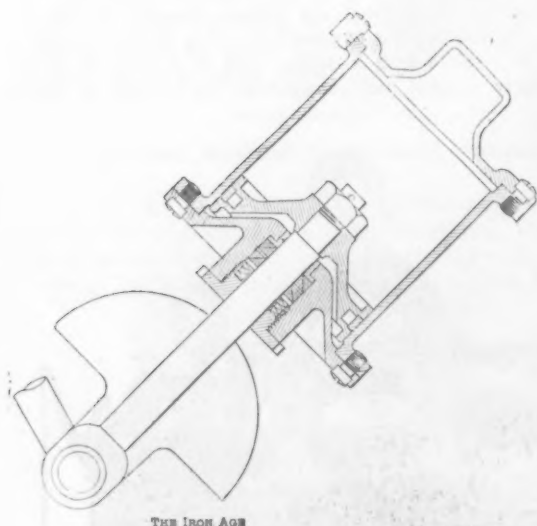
Section through One Cylinder of Engine, Showing Conical Piston.
